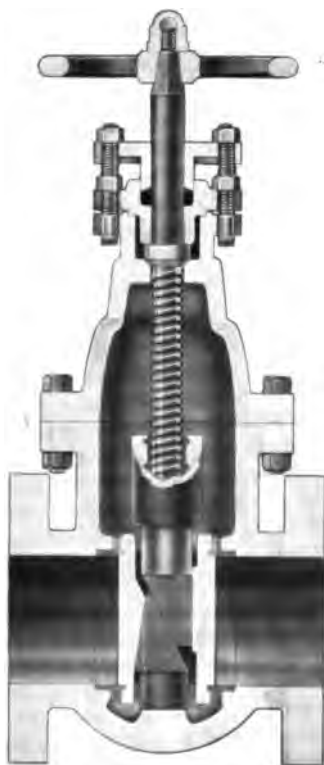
SECTIONAL VIEW OF HIGH PRESSURE GATE VALVE
